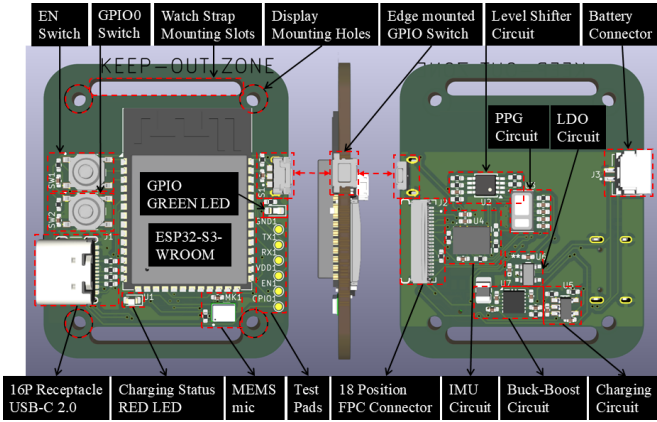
Annotated component placement layout of the smartwatch PCB.
